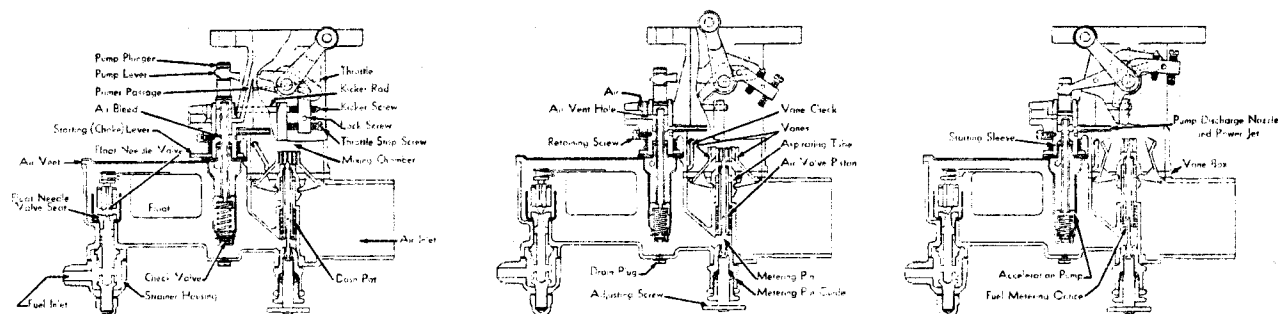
Diagrams of 370-B and 452-B carburetor showing principles of construction. For the sake of clearness some parts are not shown in their true positions
